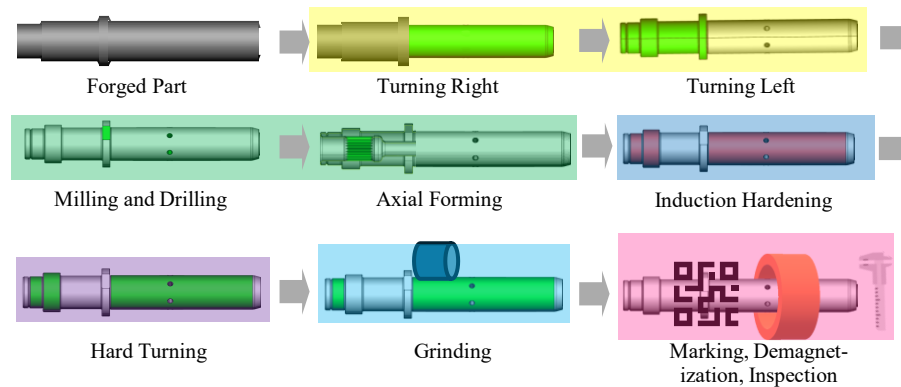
Sample manufacturing process flow for a rotor shaft.
